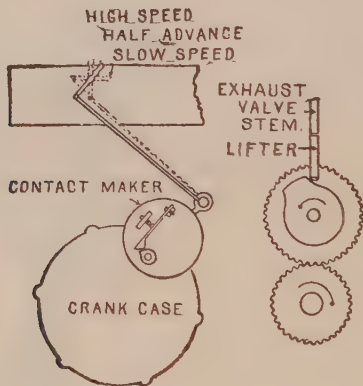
Timing motor cycle valves. After removing contact maker and gear case covers and the large gear, 1, the crank is placed on the upper dead center, and 2, the large gear and cam replaced, the large gear meshing with its driver in such a way that the cam is just breaking away from the lifter as shown in the figure. The gear case cover and contact maker are now replaced. The proper timing of the valve causes it to close on the dead center.
